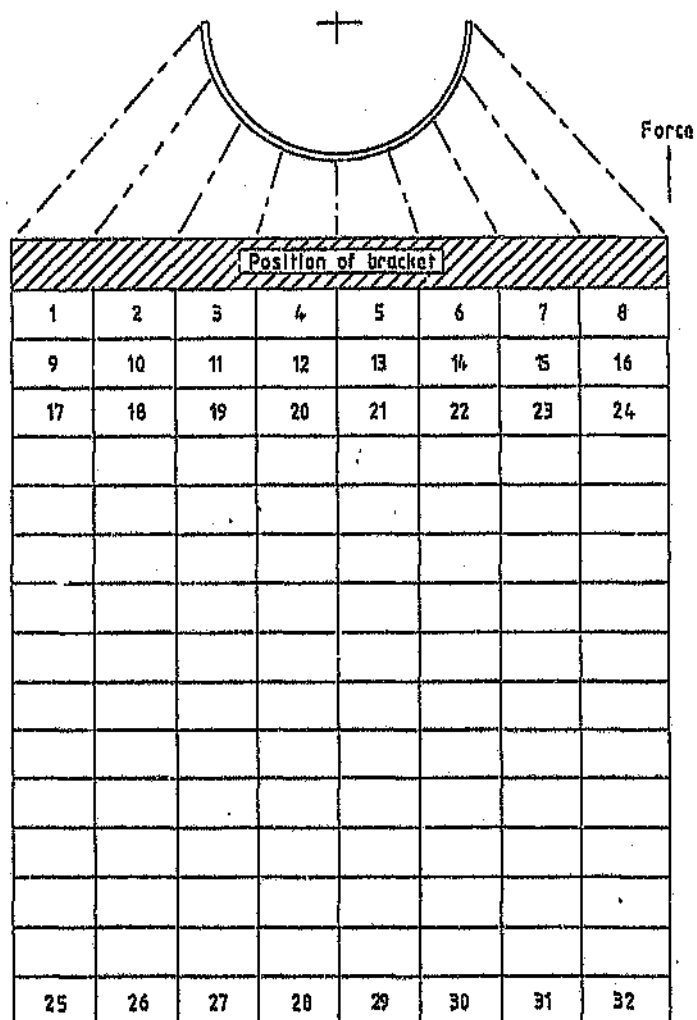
Layout of the tube showing the positions of the rosettes.
